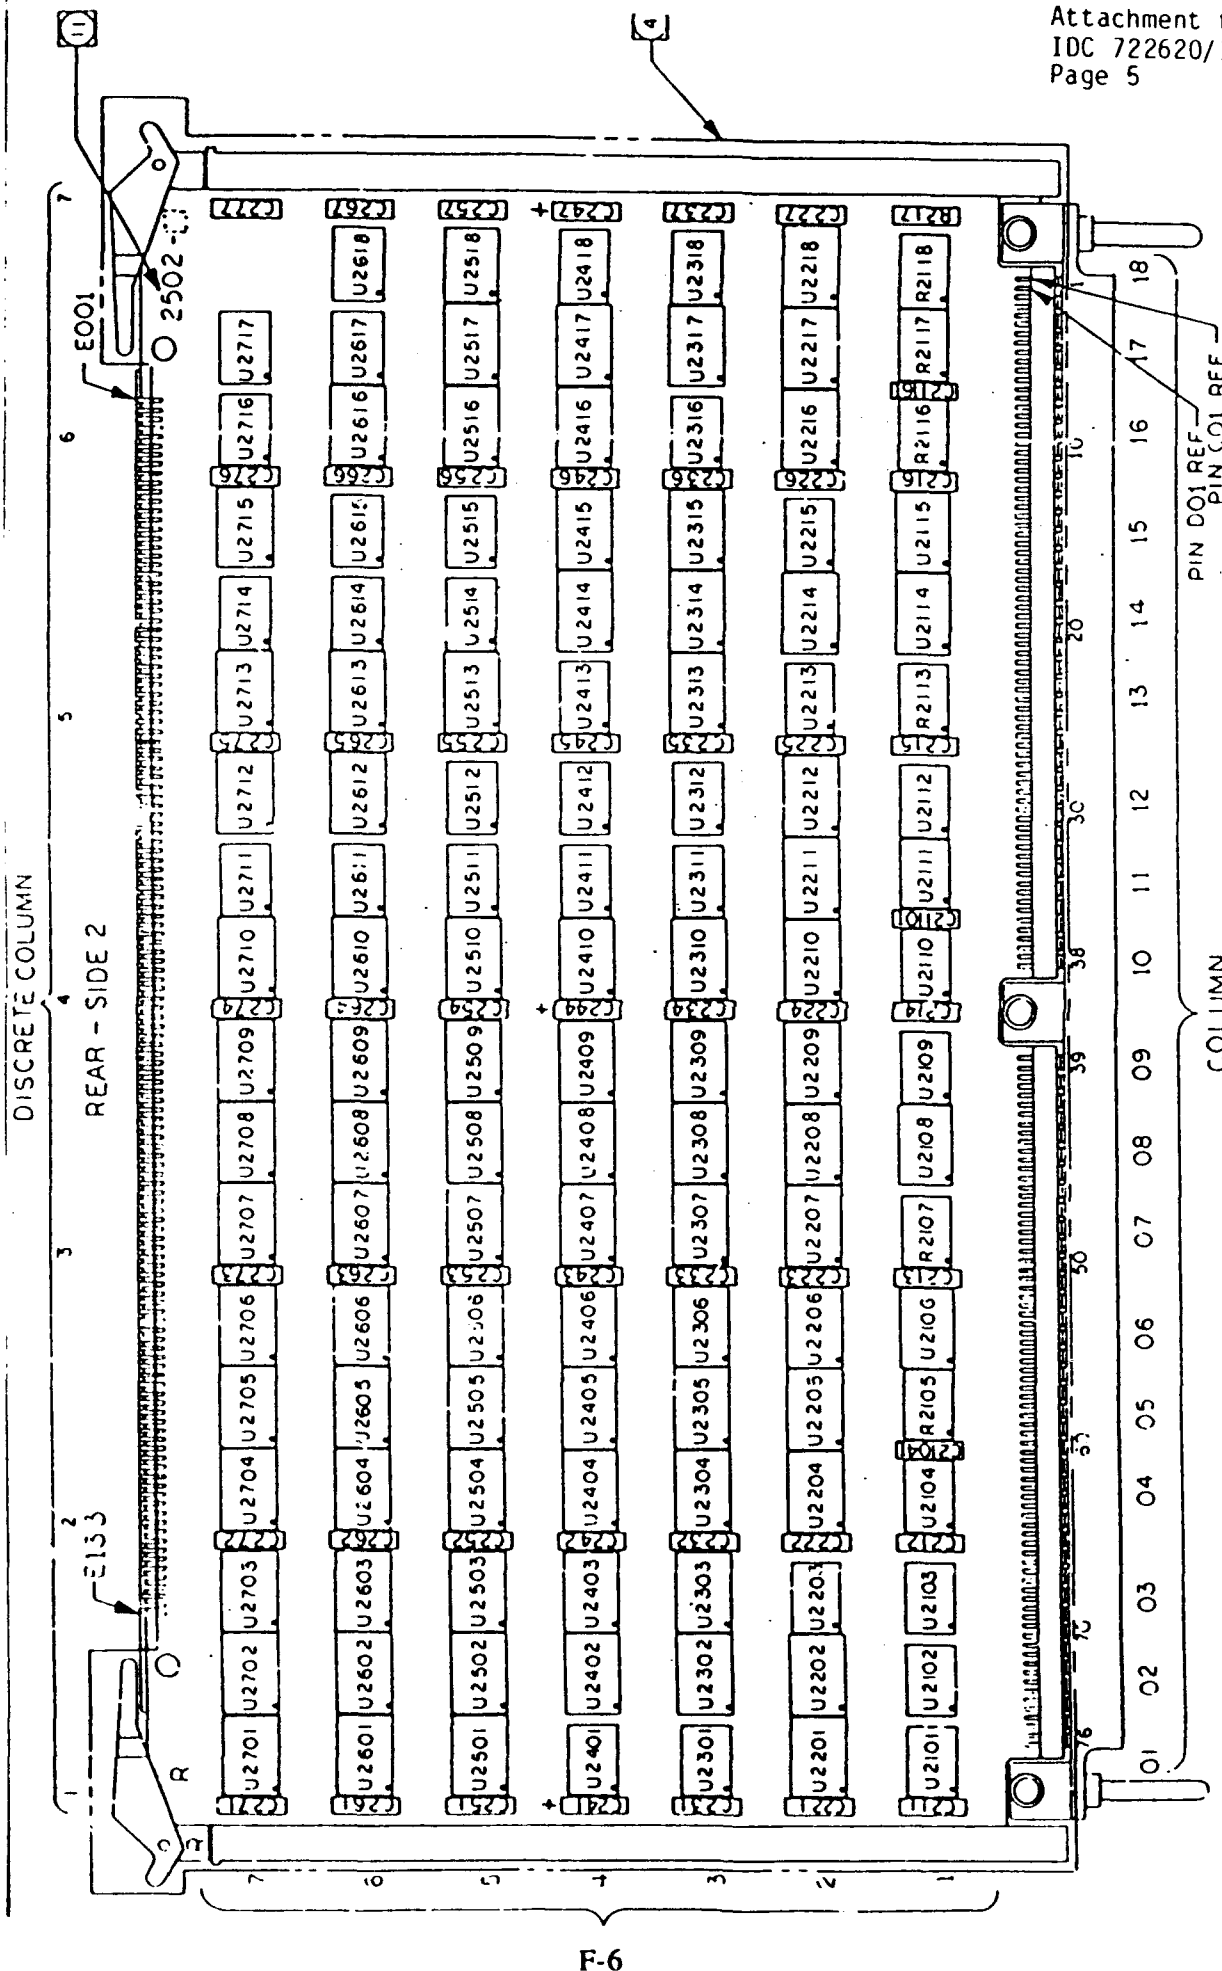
COMPONENT LAYOUT - REAR SIDE 2
